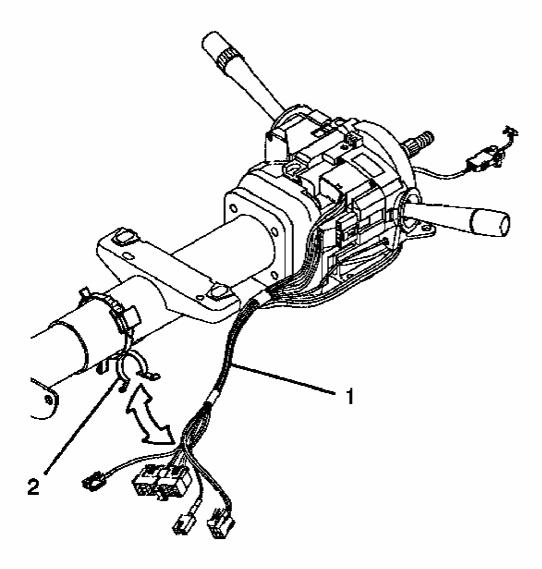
View Of Steering Column Wire Harness Assembly & Wire Harness Strap Courtesy of GENERAL MOTORS CORP.
